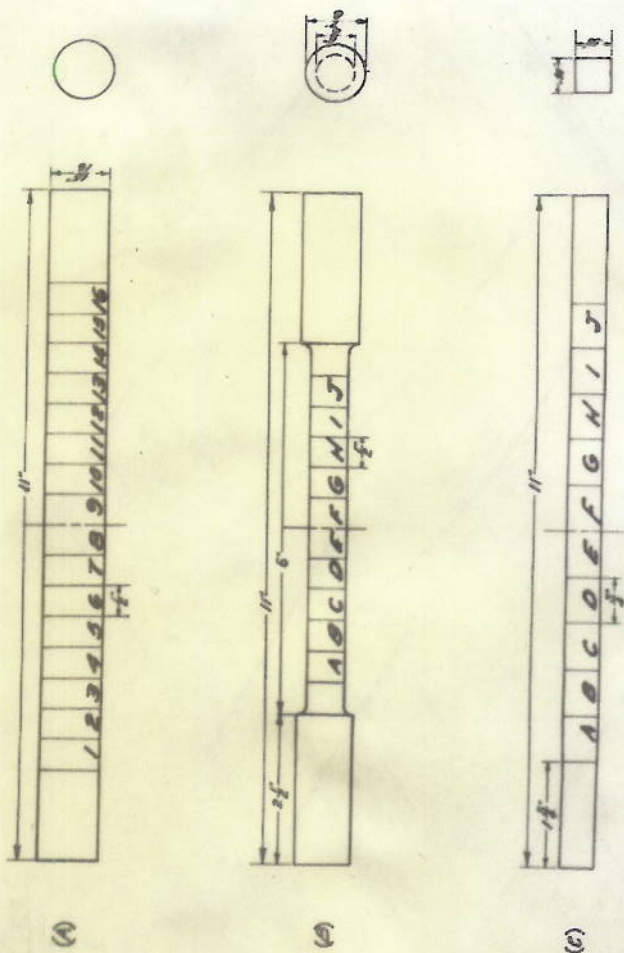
Initial Dimensions of Samples. A. Torsion bar. B. Tensile bar. C. Rolling bar. Transverse lines indicate manner of taking samples.
